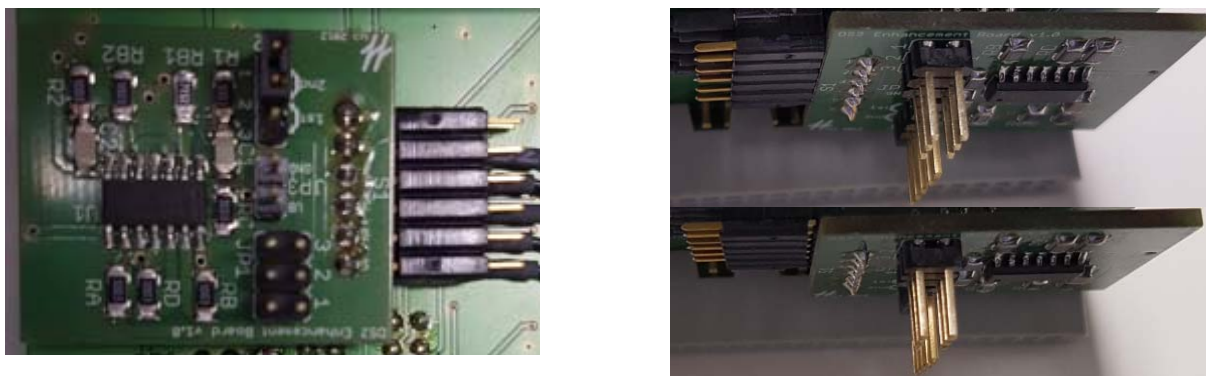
(a) *DSM* board under *ADA* board, (b) electrically connected and (c) parking position
